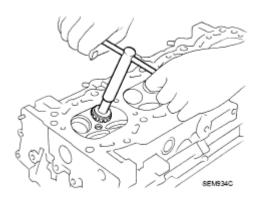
Cutting Valve Seat Courtesy of NISSAN MOTOR CO., U.S.A.
